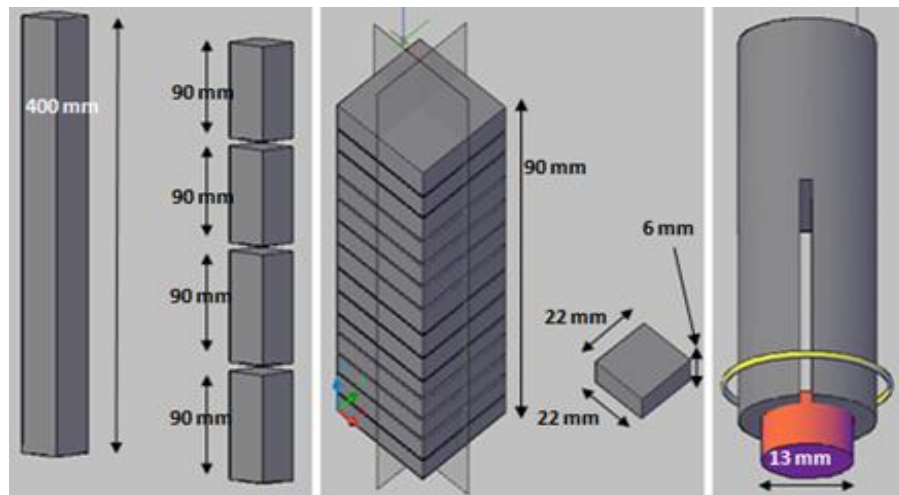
Preparation of workpiece from hardened die steel using wire cut EDM. The 7x13 mm² electrodes prepared using lathe machining and milling.
